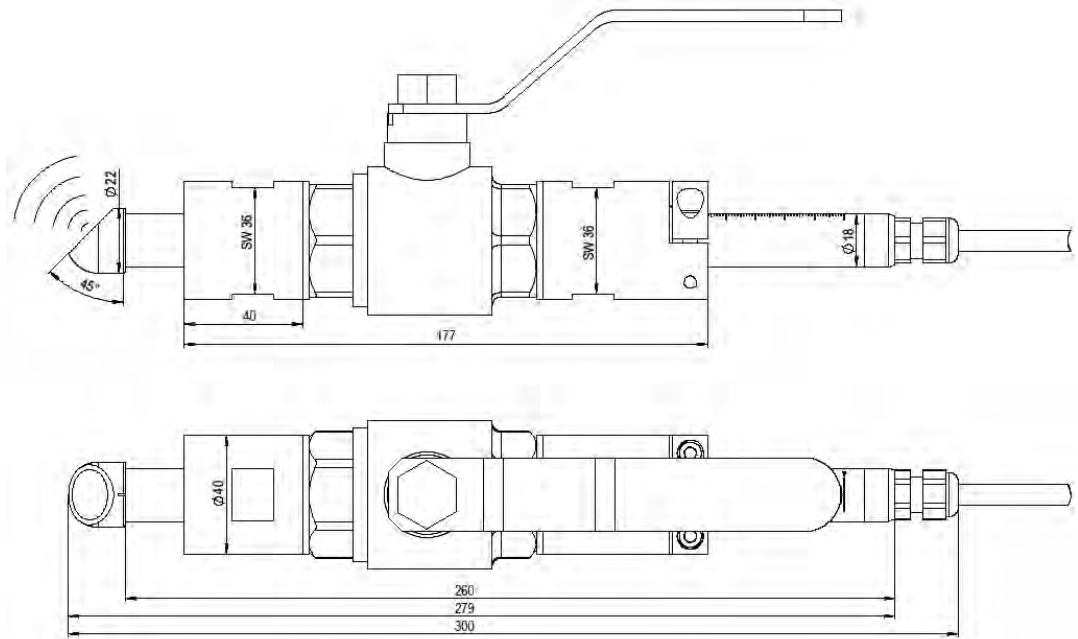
Dimensioned drawing pipe sensor Type TSP0V200RL
